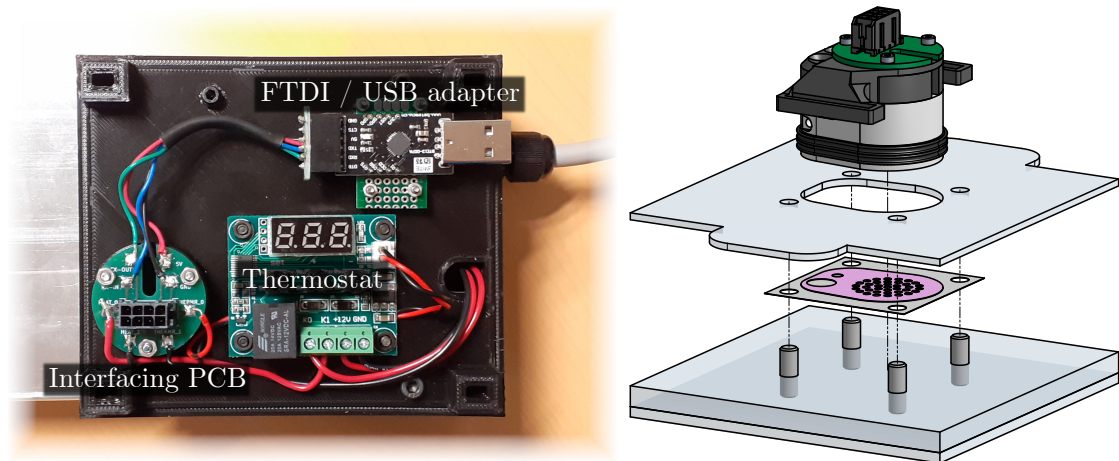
Left: the power and supply block. Right: the adhesive mounting jig with—from top to bottom—the sensor, the centring layer, the adhesive stuck onto its release liner, and the chassis.
